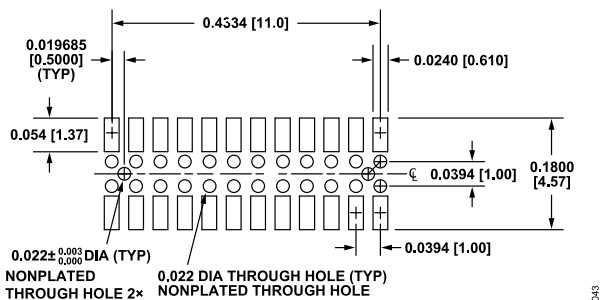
Suggested Layout and Mechanical Design when Using Samtec CLM-112-02-G-D-A for the Mating Connector
